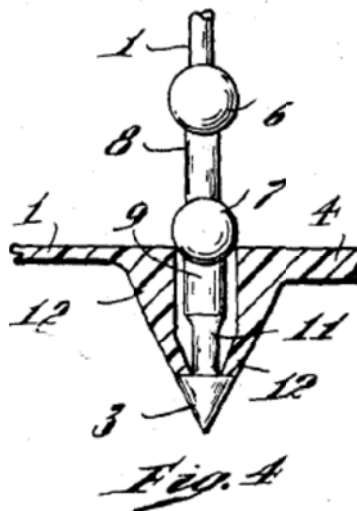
is a section of the head and socket of the device disclosed in Merser after the head has been inserted. (Merger, col. 1, ll. 45-46.)
